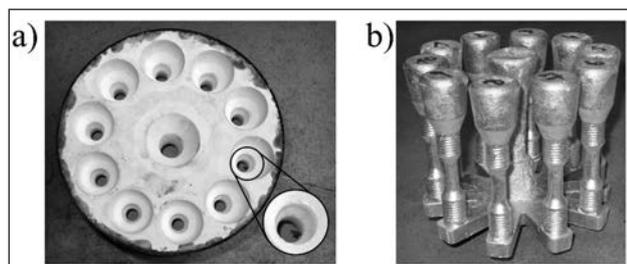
a) Casting gypsum mold with thermo-couple, b) cast strength specimens
